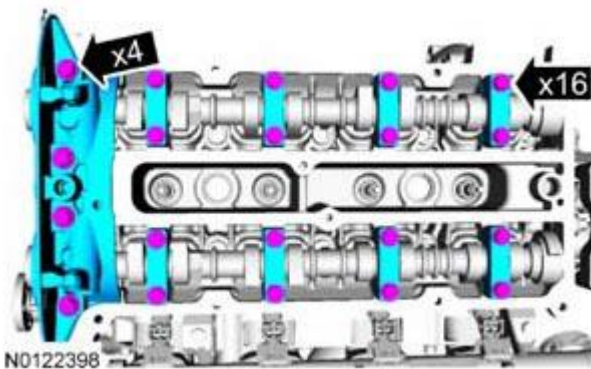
Locating Camshaft Bearing Caps, VCT Bridge And Bolts
